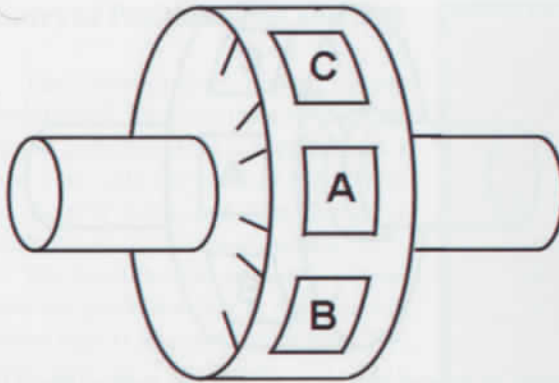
Drawing of 3-relief transfer roll with marks scribed on the flat side even with the top and bottom edge of each relief
